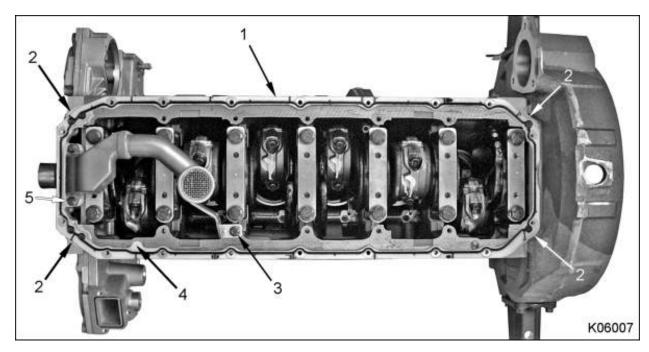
Oil pan gasket, RTV sealant locations, and suction tube assembly (front sump)
